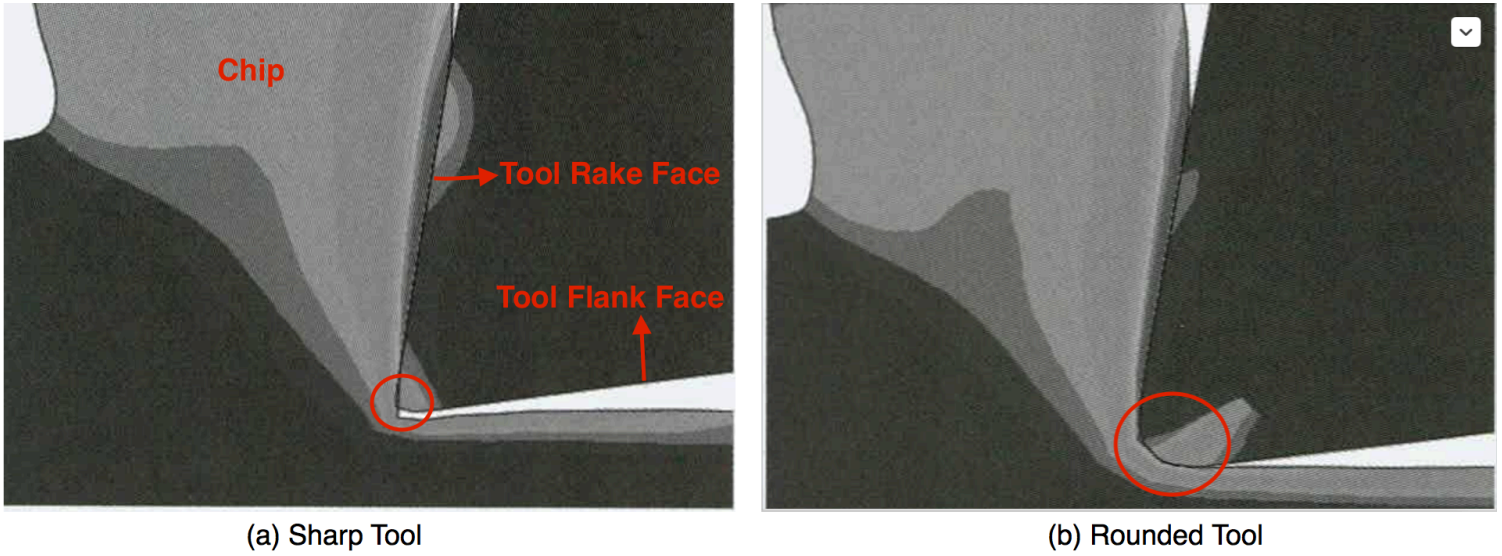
Tool tip contacting area made with workpiece for (a) Sharp tool; (b) Rounded tool
